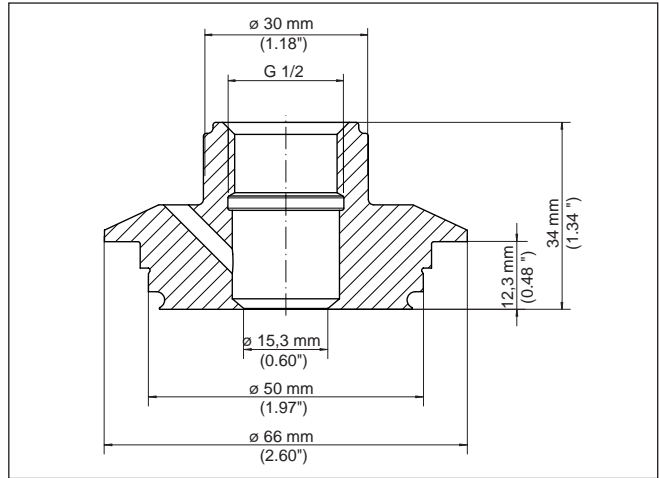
Dimensions hygienic adapter G 1/2 (DIN 3852-X) on Varivent Form F DN 25 - Cone seal
